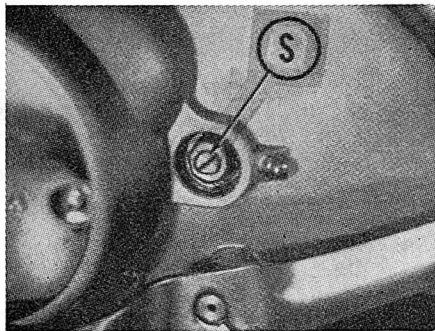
The clutch adjusting screw (S) is located under rubber plug in engine left side cover.
